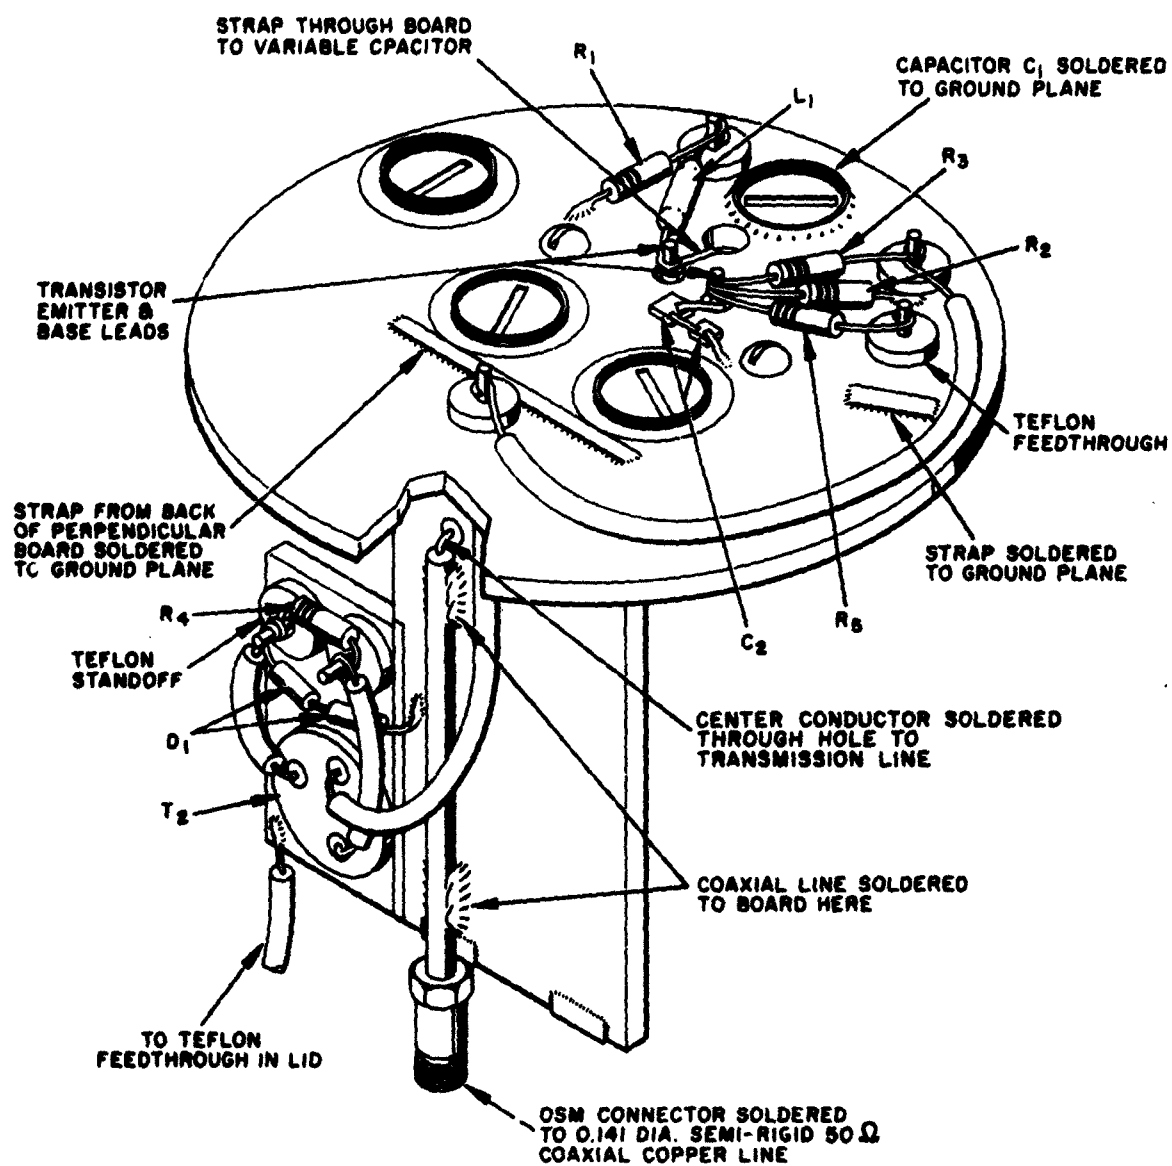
CIRCUIT ASSEMBLY (BACK VIEW)
